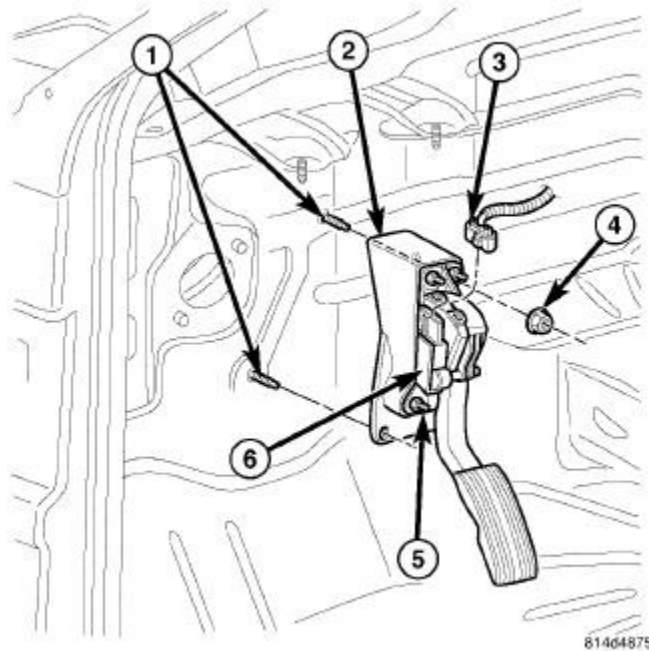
Removal & Installation Of Accelerator Pedal W/Apps
